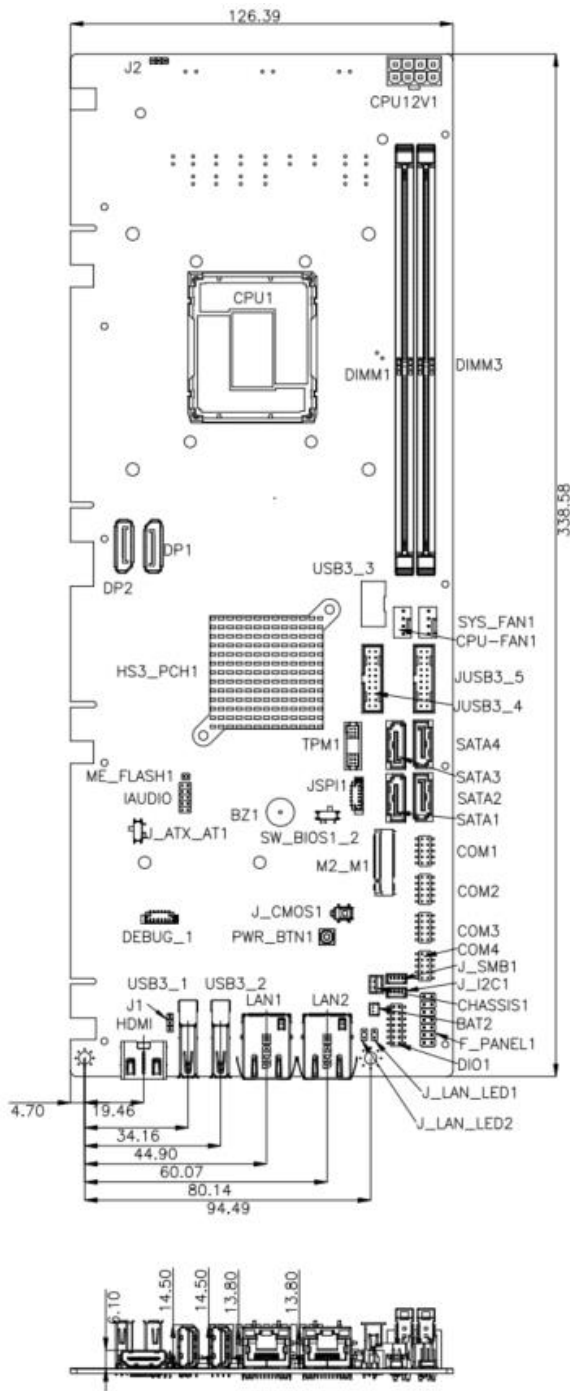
PCIE-RPL-Q670 Dimensions (mm)
